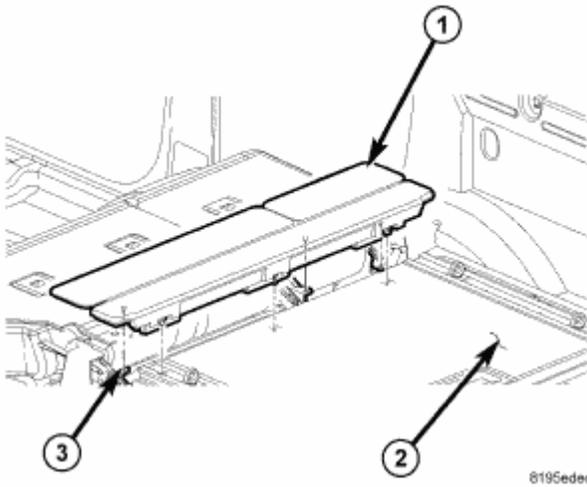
Load Floor Panel, Load Floor & Rear Seat Bracket
